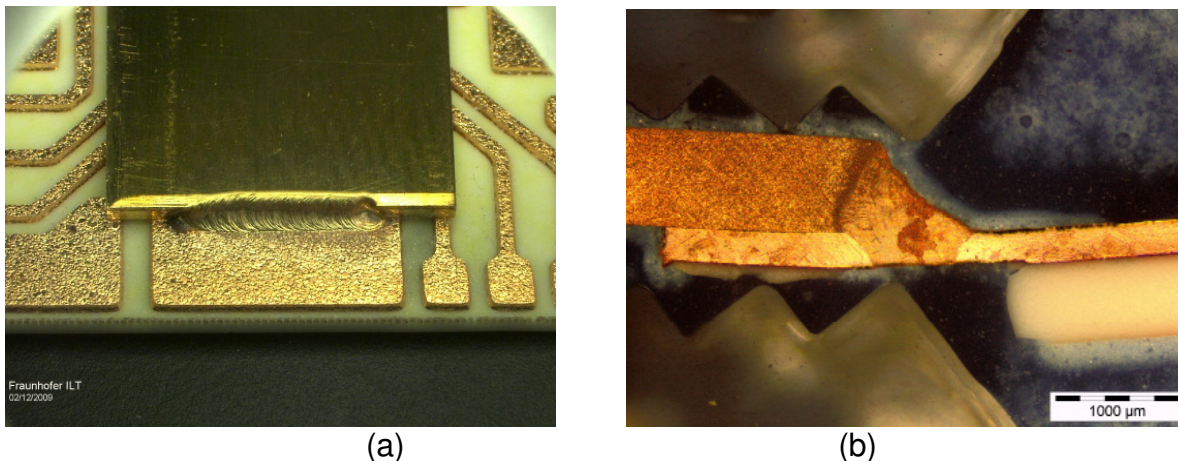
(a) Laser welded DCB with contact sheet (b) Cross section of laser welded DCB contact.
